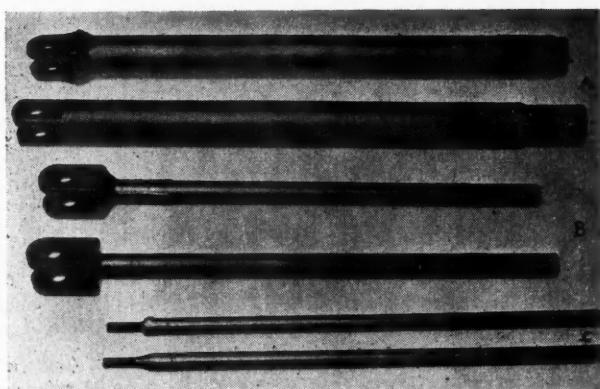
Macrophotographs of typical flash welds in the as-welded and heat treated condition.
